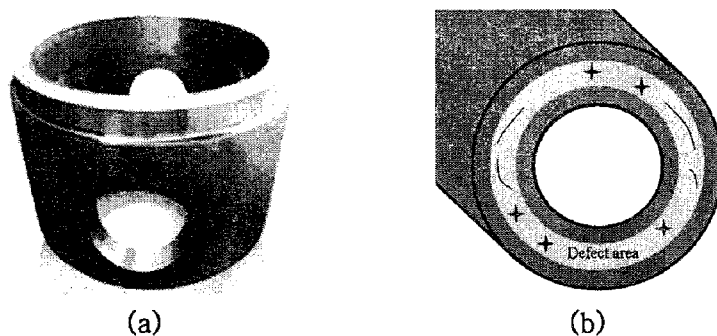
Photo showing (a) large ring forged product and (b) schematic diagram showing the location where the defects were found.
